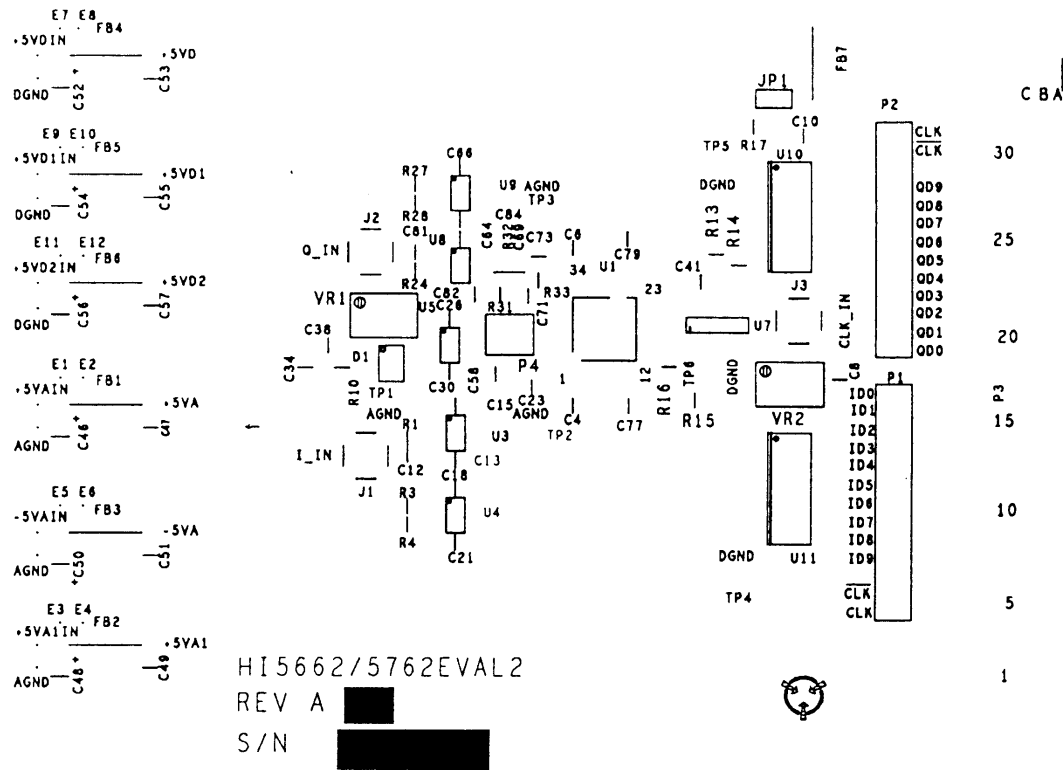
HI5762EVAL2 EVALUATION BOARD PARTS LAYOUT (NEAR SIDE)
